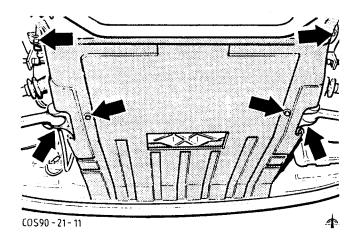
Retaining bolts of lower engine cover. (Sierra shown)
